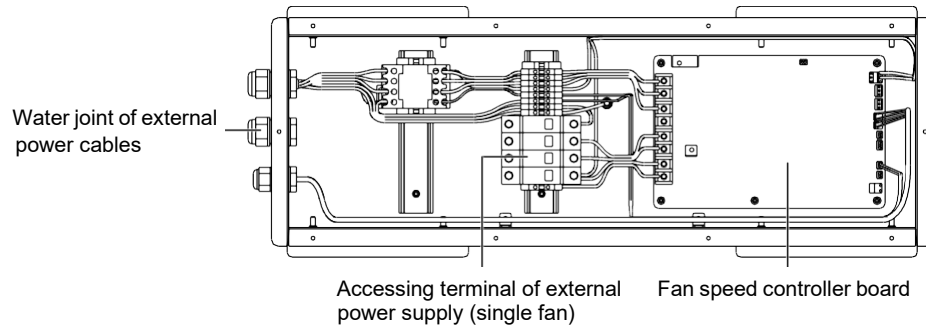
Connection figure of single fan external power cables (taking LDF42 for example)
